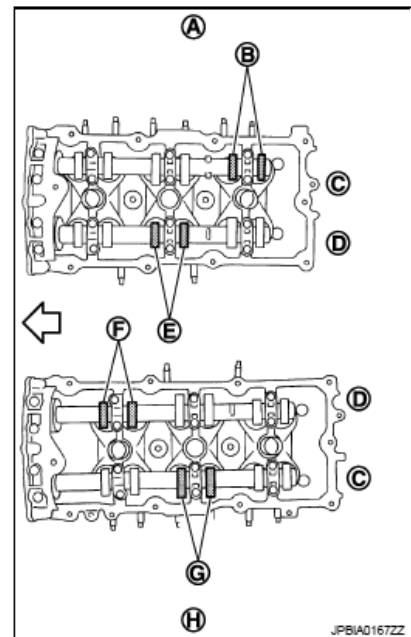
Identifying Intake And Exhaust Valve Clearances
